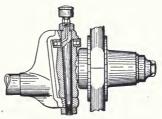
Detail of Steering Knuckle, Rambler Car. Thomas B. Jeffery & Co., Kenosha, Wis.
